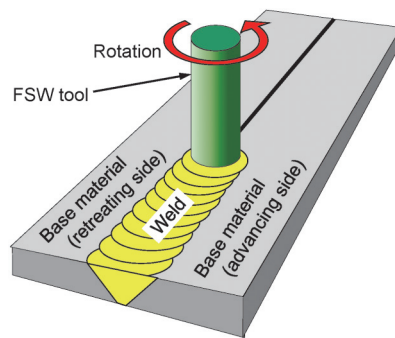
(Color online) Schematic of friction stir welding (FSW).
